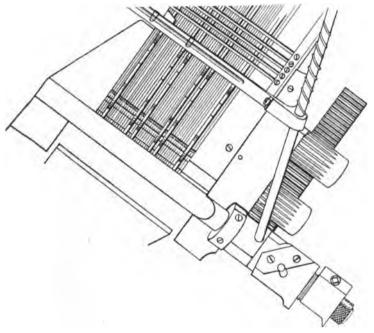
Typograph; line of single-letter matrices, line-justified ready for casting.
